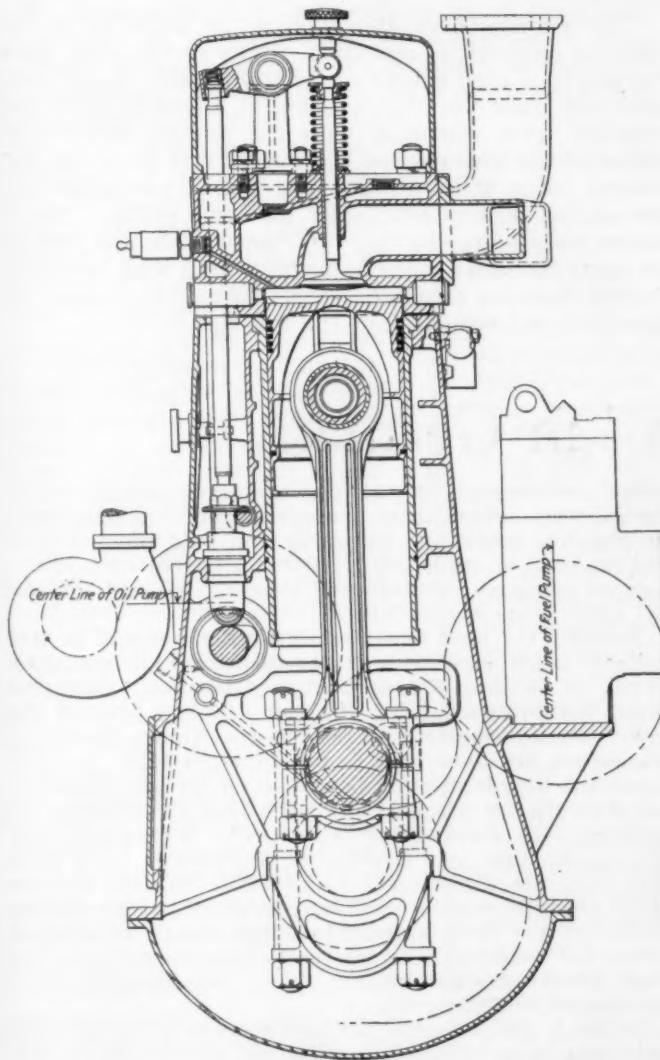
CROSS-SECTION OF THE ENGINE SHOWN IN FIG. 5
